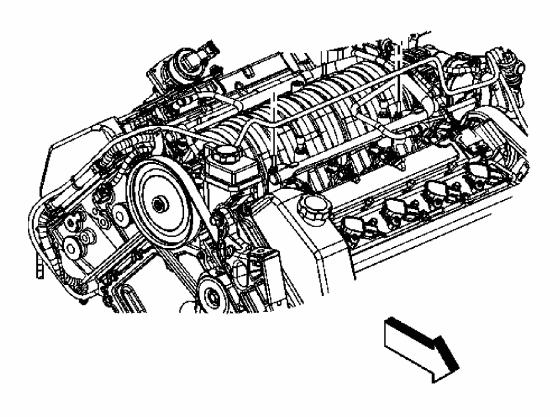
Locating Coolant Heater Cord Tabs Courtesy of GENERAL MOTORS CORP.
